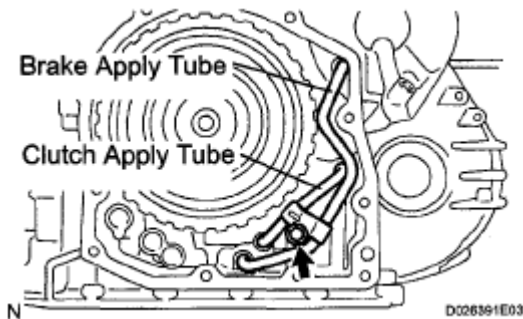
Identifying Brake Apply Tube And Clutch Apply Tube
